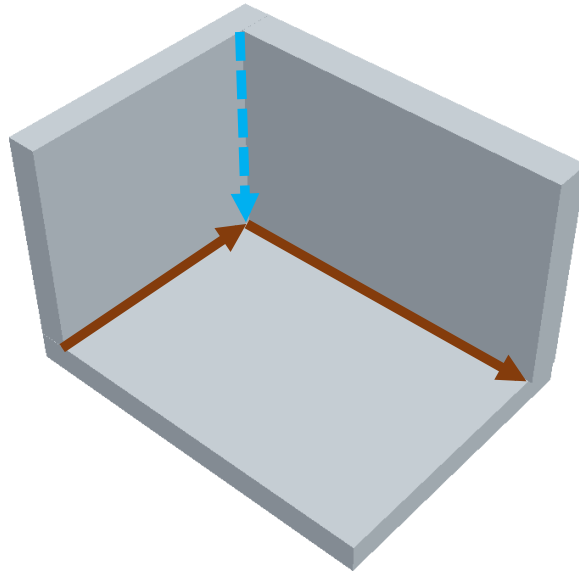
The simple welding joints used for testing system performance. *Fillet weld* in horizontal position is illustrated by brown arrows, *fillet weld* in vertical position by a blue arrow.
